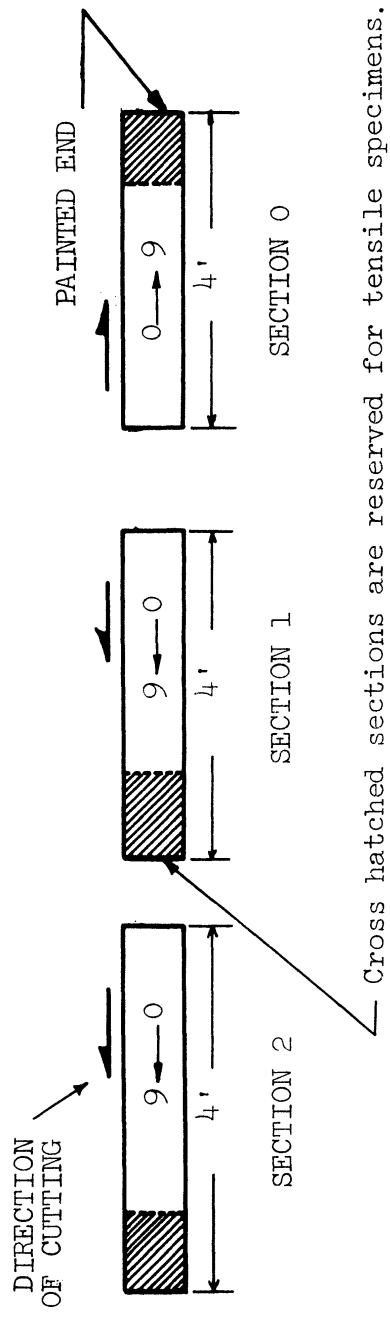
Section and Position Numbering Scheme for Specimens as Cut from Bar.
